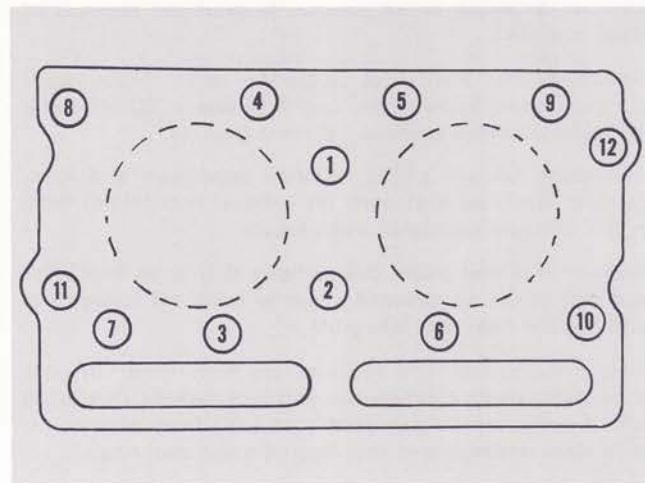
Cylinder head capscrew tightening sequence — GNH $5\frac{1}{2}$ " bore N11427
